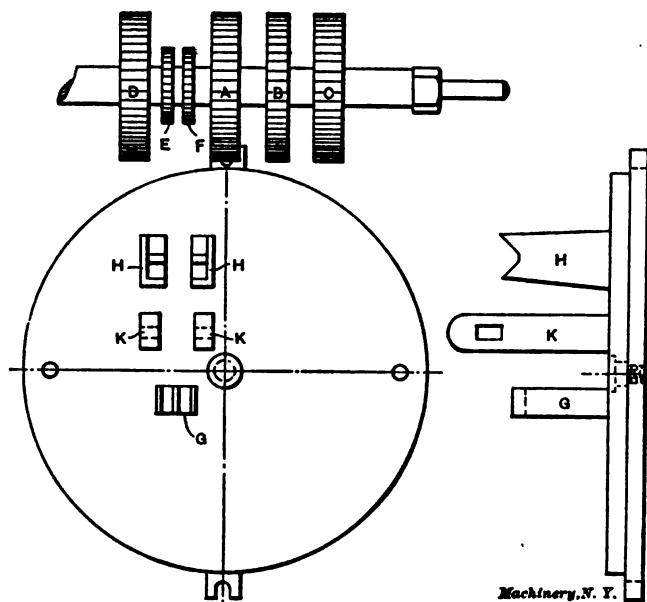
Fixture for Milling Work shown in Fig. 58, at One Setting
